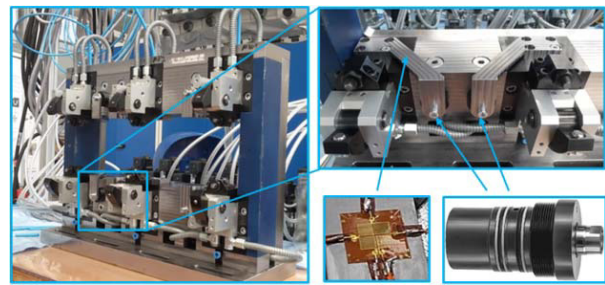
Integration of sensors and actuators in fixture frame with PosiFlex clamping claws
